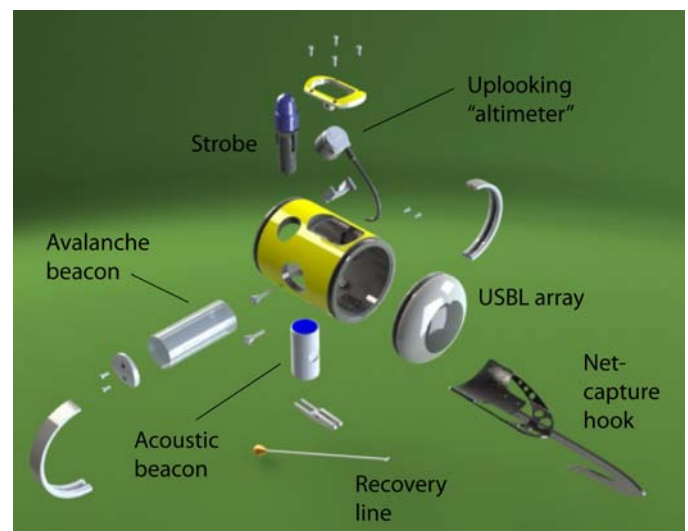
Exploded design drawing of the hull extension module, the nose cap with USBL array, and the net-capture hook assembly.
